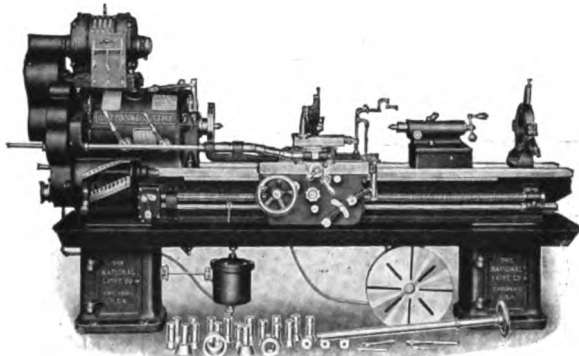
22-Inch Heavy Duty, Geared Head Lathe, Equipped for Tool Room
